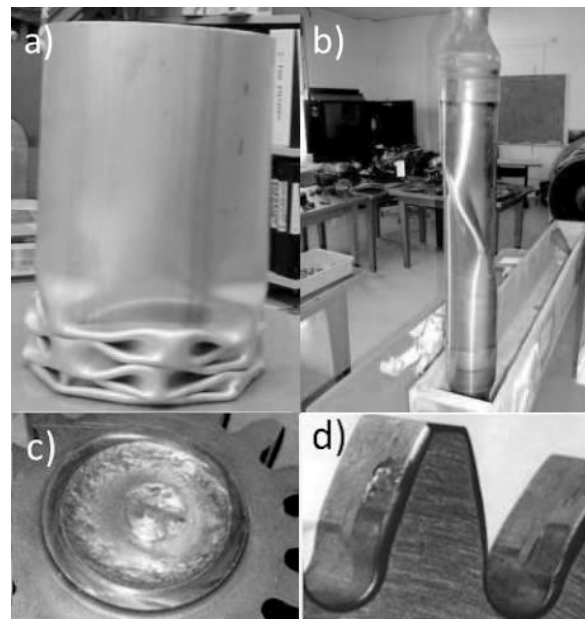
a) compressive buckling failure of metal cylinder [13] b) torsional buckling failure of an F18 engine shaft [13] c) torsional low-cycle fatigue fracture of a shaft [13] d) spalling failure on the surface of a gear tooth caused by surface fatigue [3]
